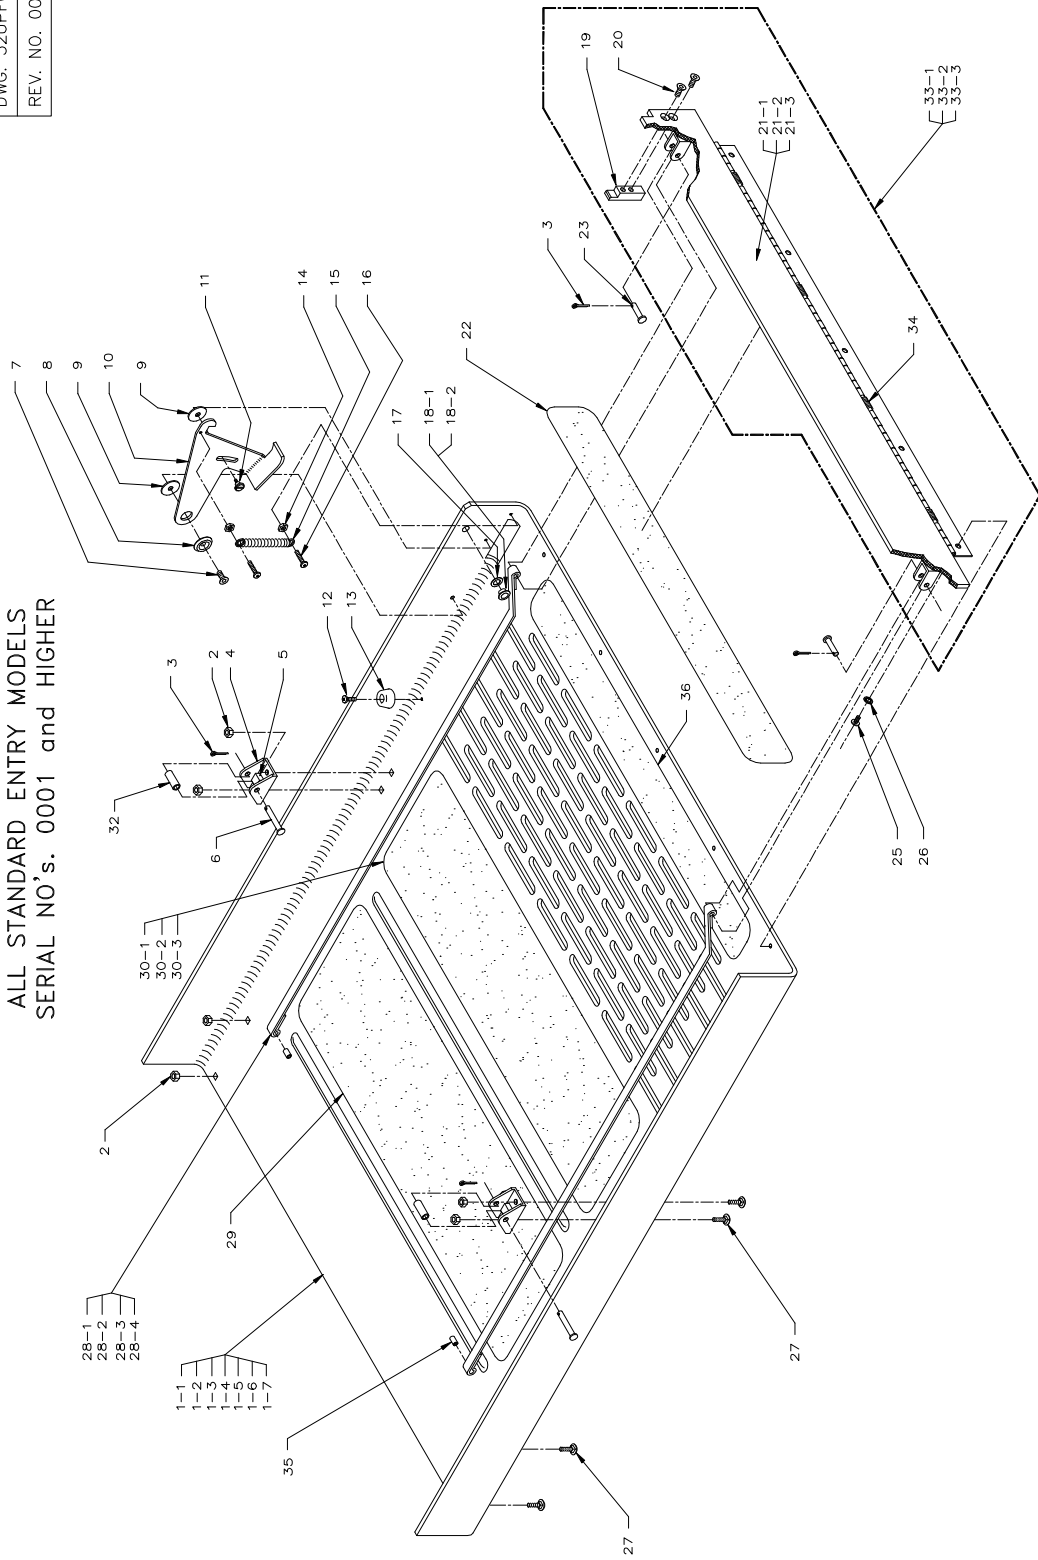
UNI-LITE PLATFORM ASSEMBLY
